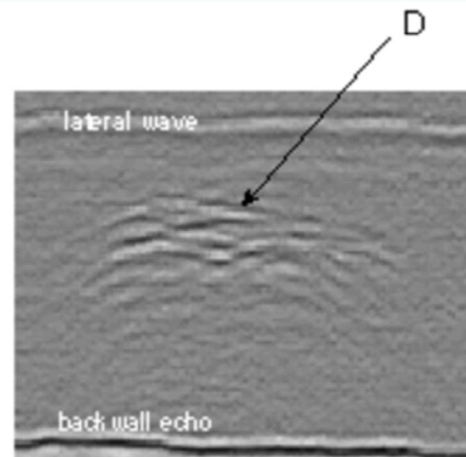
TOFD D-scan of butt weld and defect
